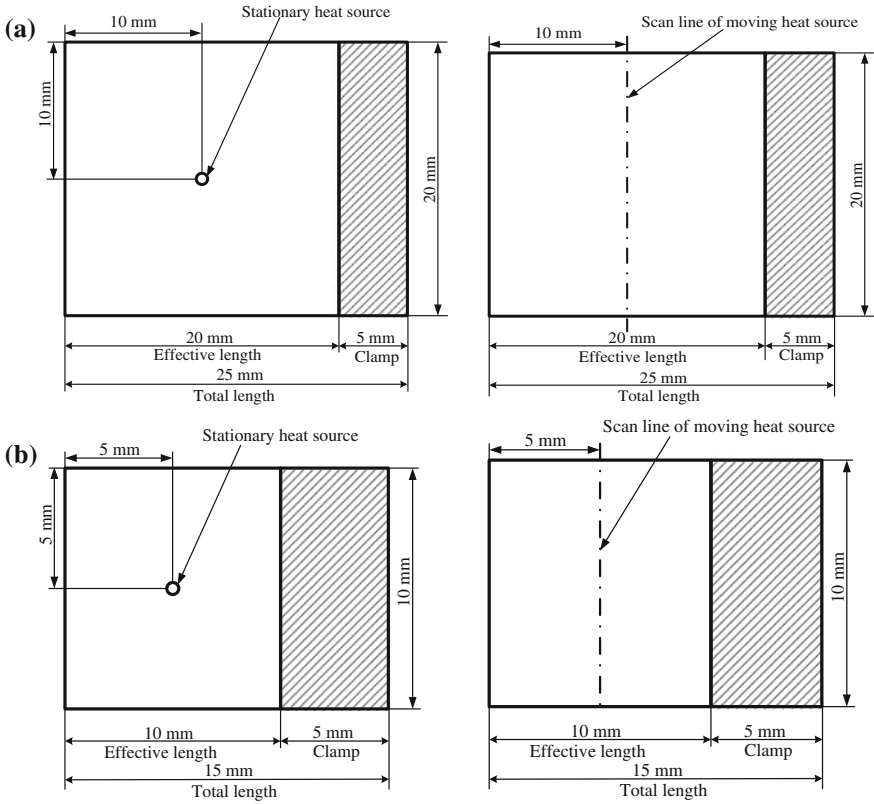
The work-pieces for movable and stationary heat source a 25 mm × 20 mm × 2 mm sheet. b 15 mm × 10 mm × 2 mm sheet
